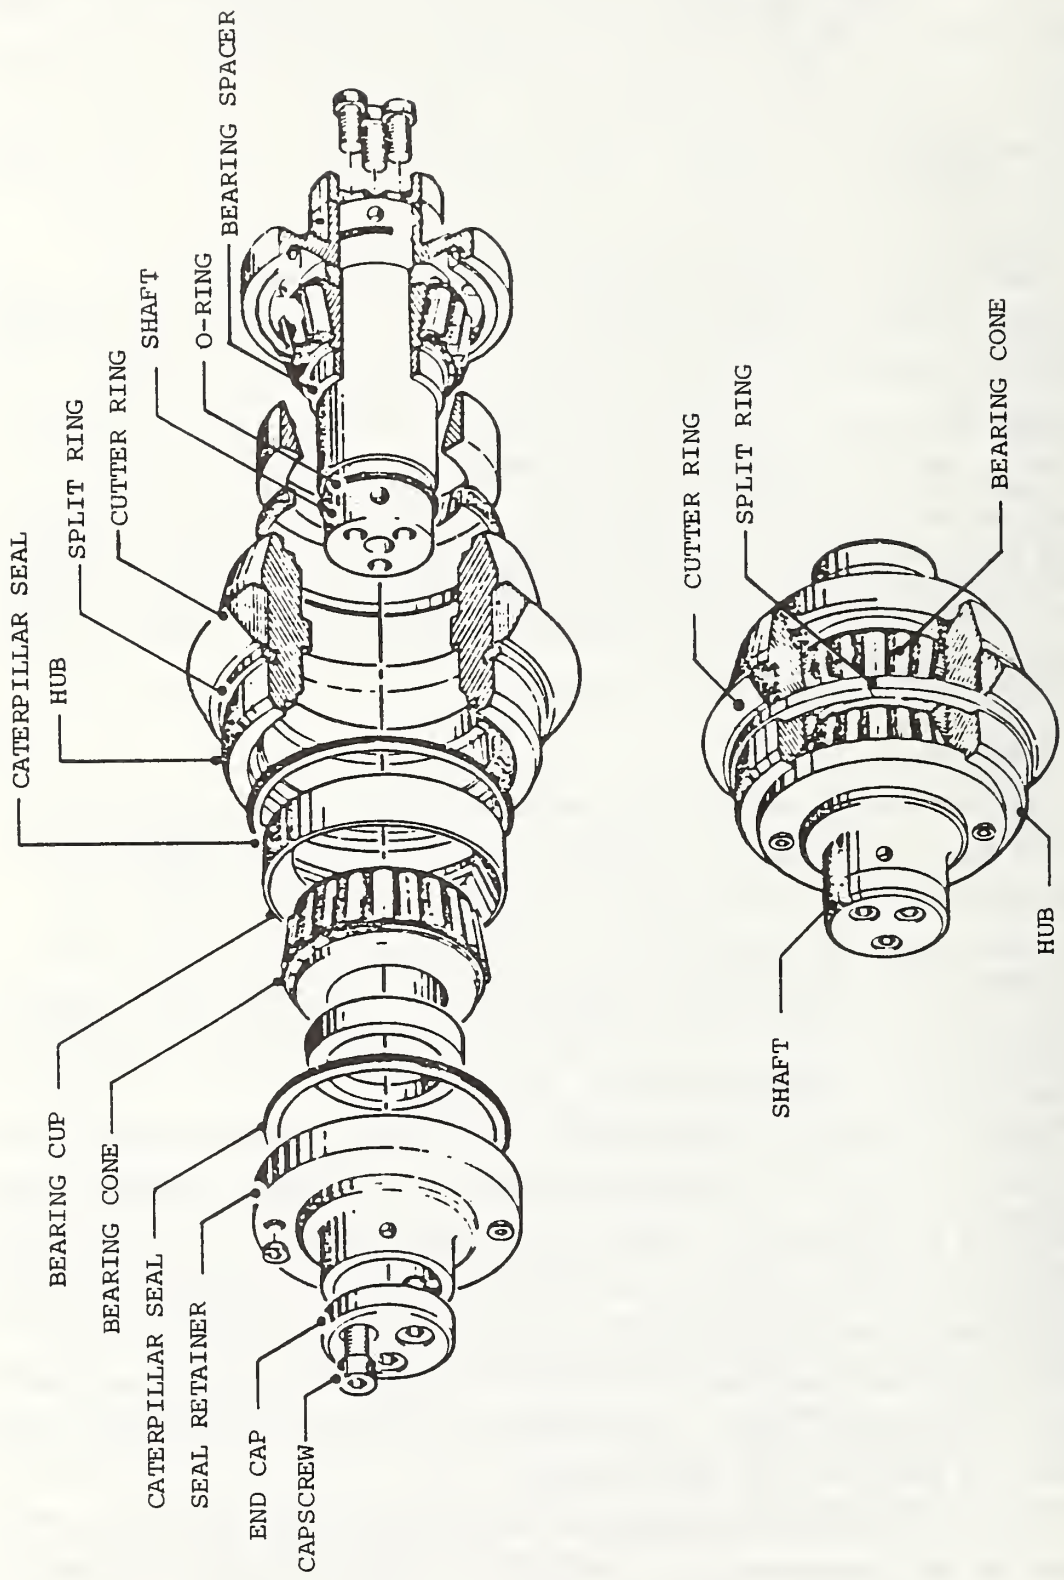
THREE-DIMENSIONAL, CUT-AWAY VIEW OF DISC CUTTER
